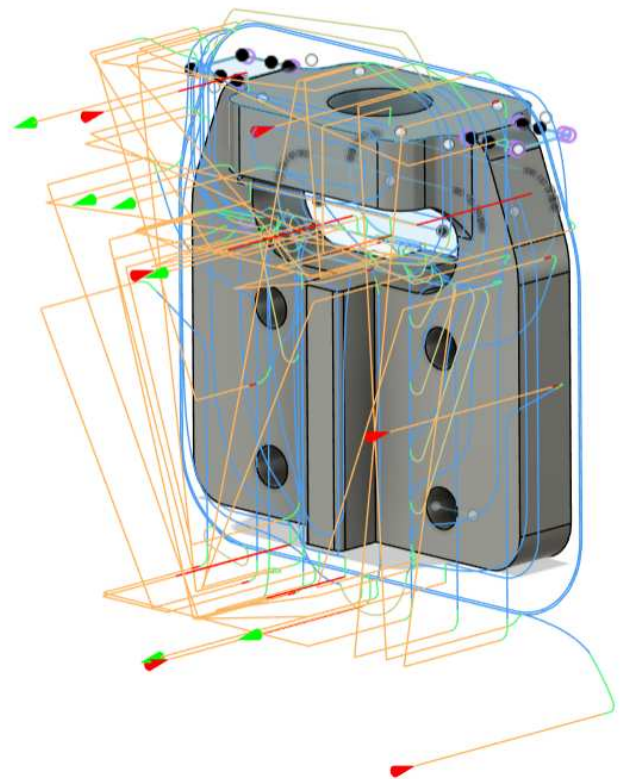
Paths Programmed for the CNC Mill for Piston-to-Rack Part
